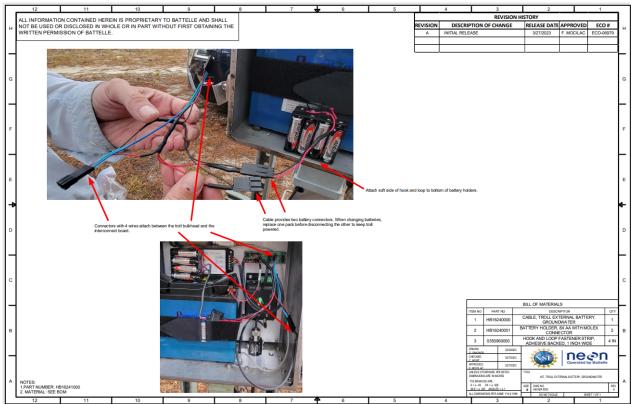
HB16240000, HB16240001, 0350960000 AA-compatible External Battery Assembly
